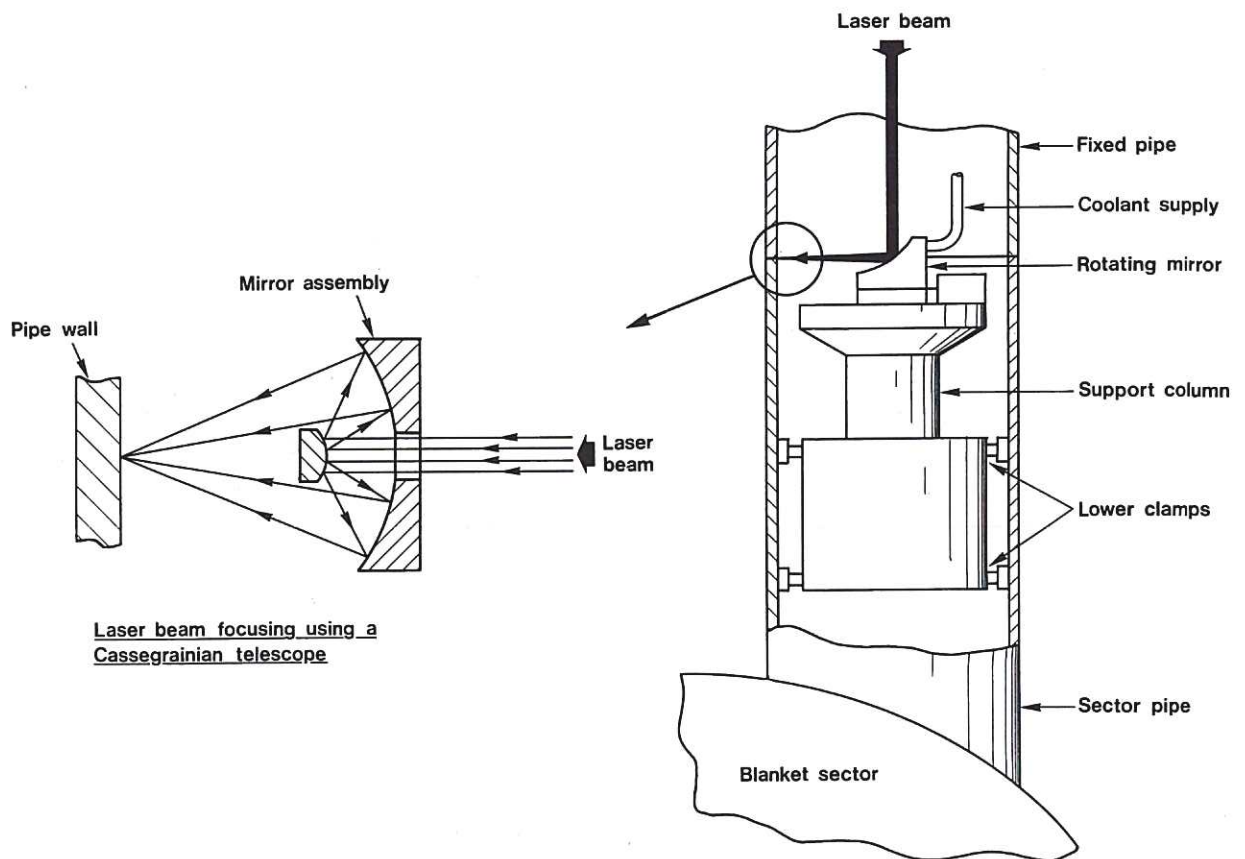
Pipe Welding performed from inside the Coolant Pipe.
